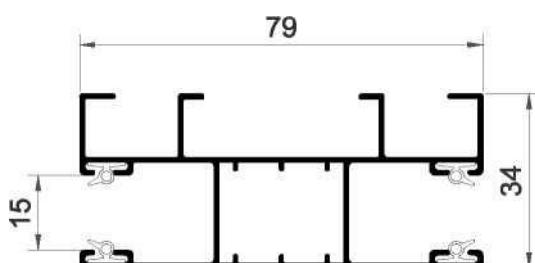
Cross-section side panel (PPD79 / ODS), a bottom slat or brush seal
